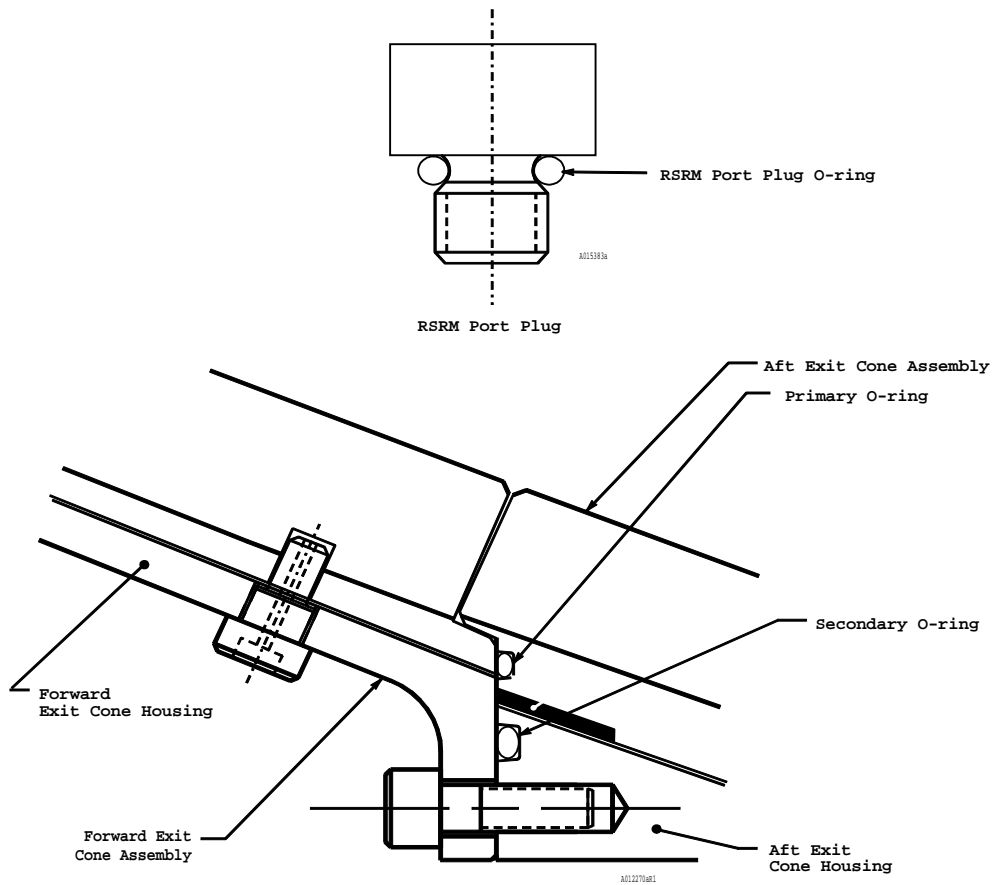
Forward-to-Aft Exit Cone Joint O-ring and Leak Check Port
